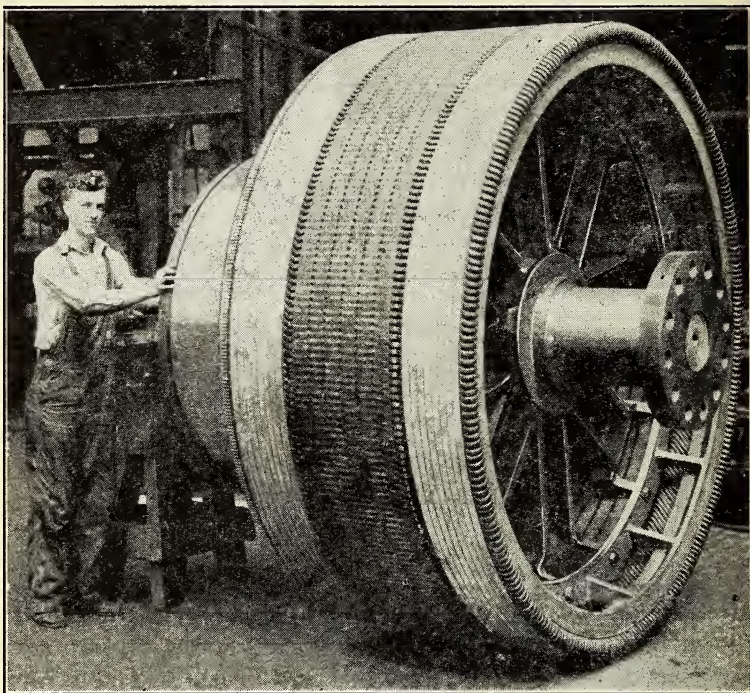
Armature of a large generator showing the armature spider. *Courtesy of the Allis-Chalmers Manufacturing Co.
